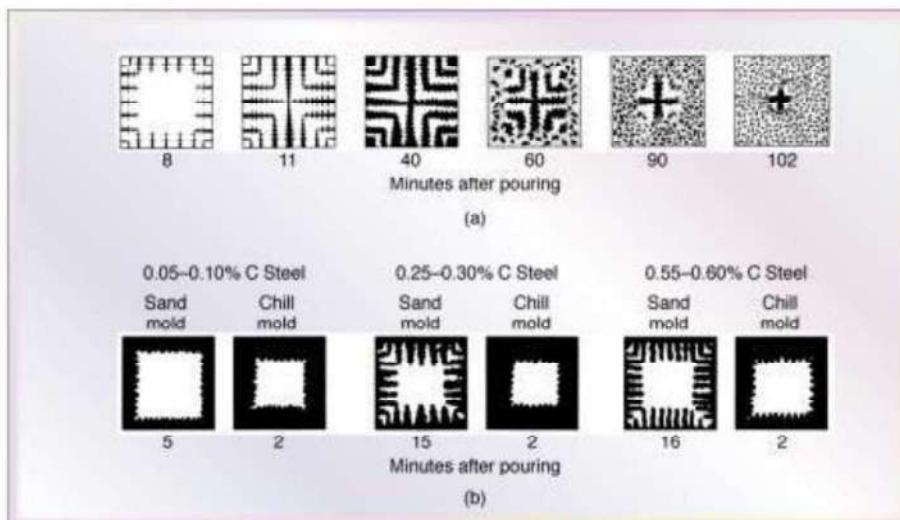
(a) Solidification patterns for grey cast iron in a 180mm square casting. Note that after 11 minutes of cooling, dendrites reach each other, but the casting is still mushy throughout. It takes about two hours for this casting to solidify completely. (b) Solidification of carbon steels in sand and chill (metal) molds. Note the difference in solidification patterns as the carbon content increases.
